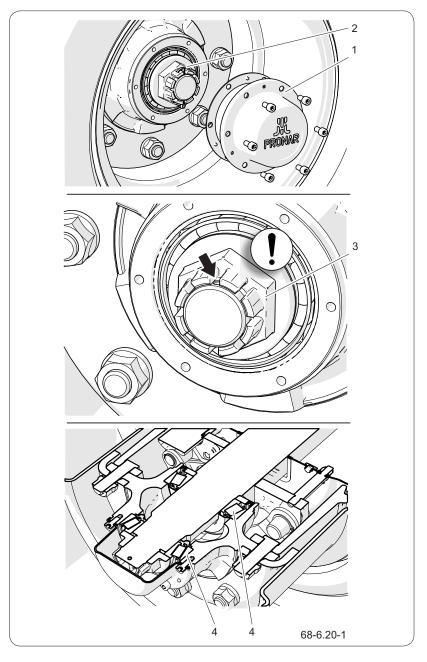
The principle of bearing clearance adjustment (1) hub cover, (2) cotter pin, (3) nut, (4) tapered roller bearing
